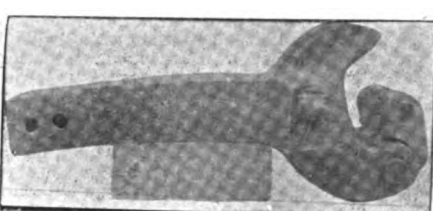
CHICAGO COUPLER—Steel; 3 blows at 10 feet, 2 blows at 15 feet.
